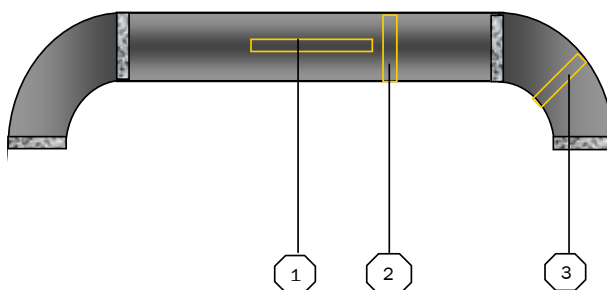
Pipe and pipe elbow (1, 2, 3 – test-tubes used for testing)
